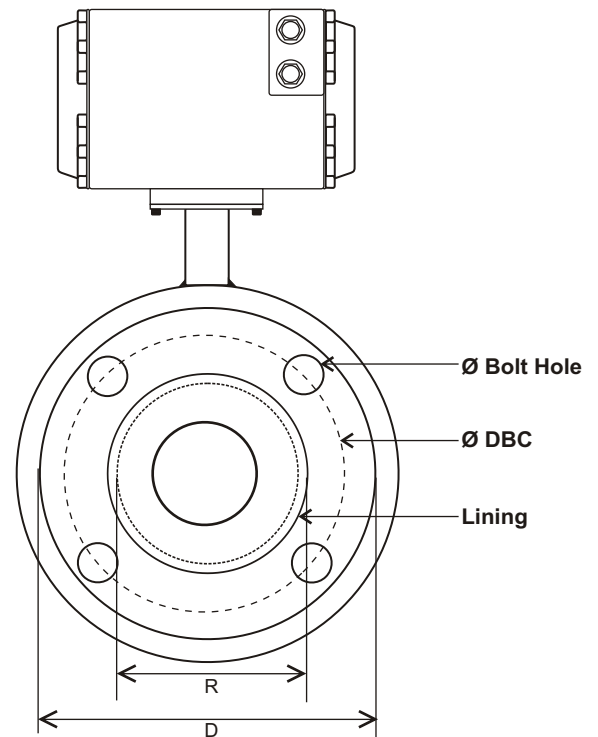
SIDE VIEW WITH FLANGE DETAILS
